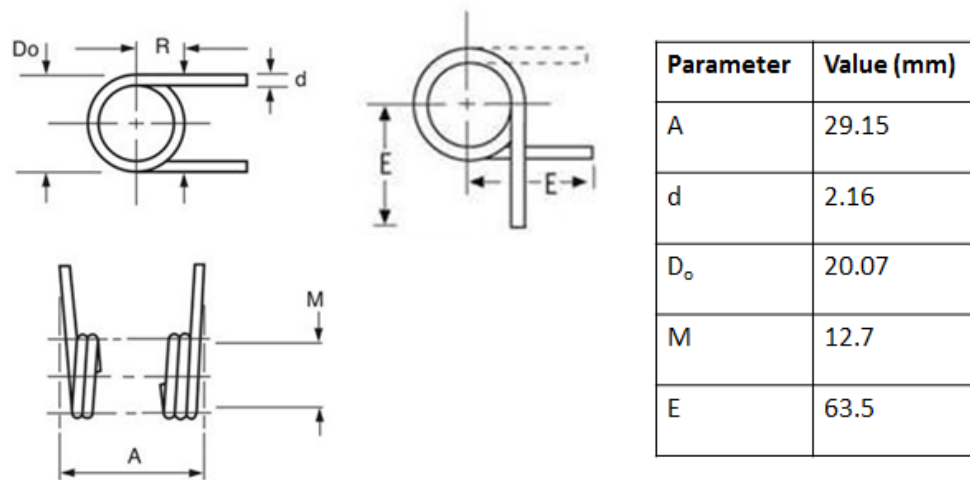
Parameters of the torsion spring chosen for the fixture
